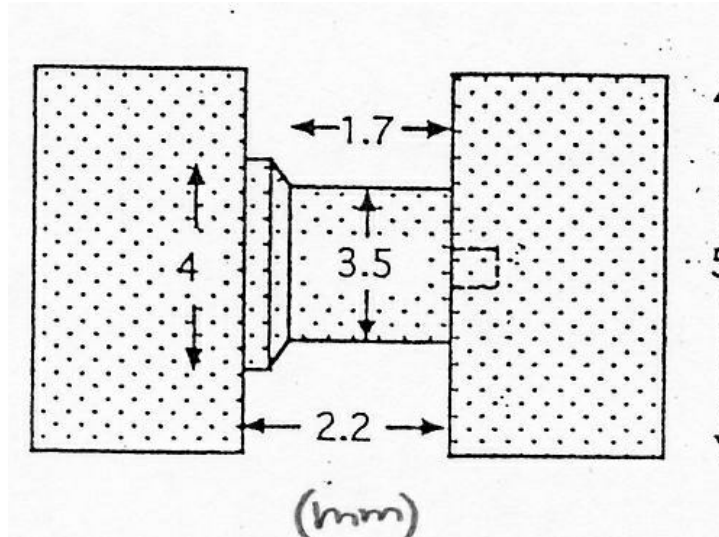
A typical delrin coil form used for winding pickup coils. The dimensions are in mm.
